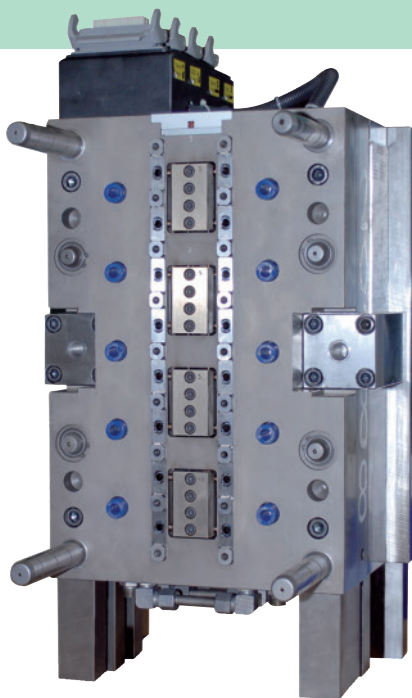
In the compact injection mold both the linearly arranged hot-runner nozzles and the cooled individual mold inserts are readily accessible from the parting surface for maintenance purposes
